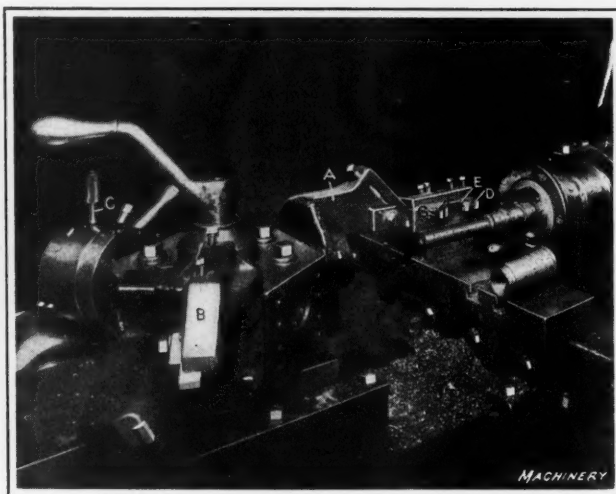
Close View of the Chuck and Tools on a Bardons & Oliver Turret Lathe used for machining Sleeve shown in Fig. 5
